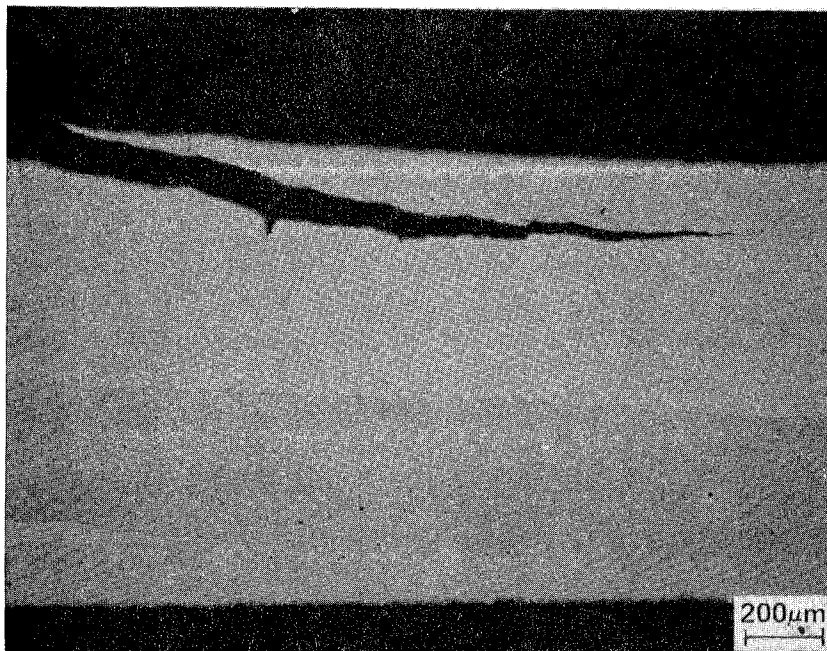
Hot Spot Blister Thermal Fatigue Cracking
